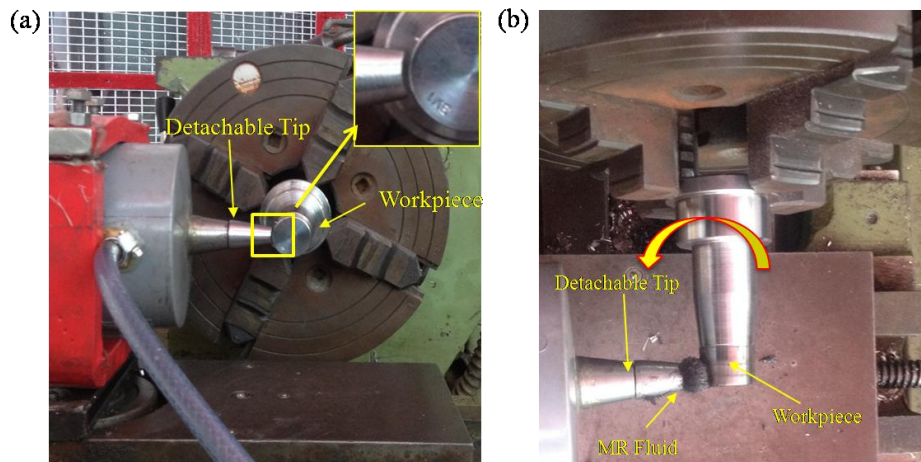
a) Front view of the workpiece held in a four jaw chuck and gap maintained between the detachable tool tip and cylindrical surface of the workpiece, (b) top view of the workpiece with MRP fluid filling the gap between tool tip and cylindrical surface during the finishing process
